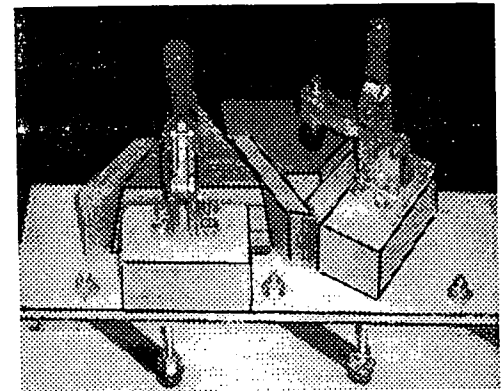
Finished Sanding Jig With Clock Pieces Clamped in Place.
